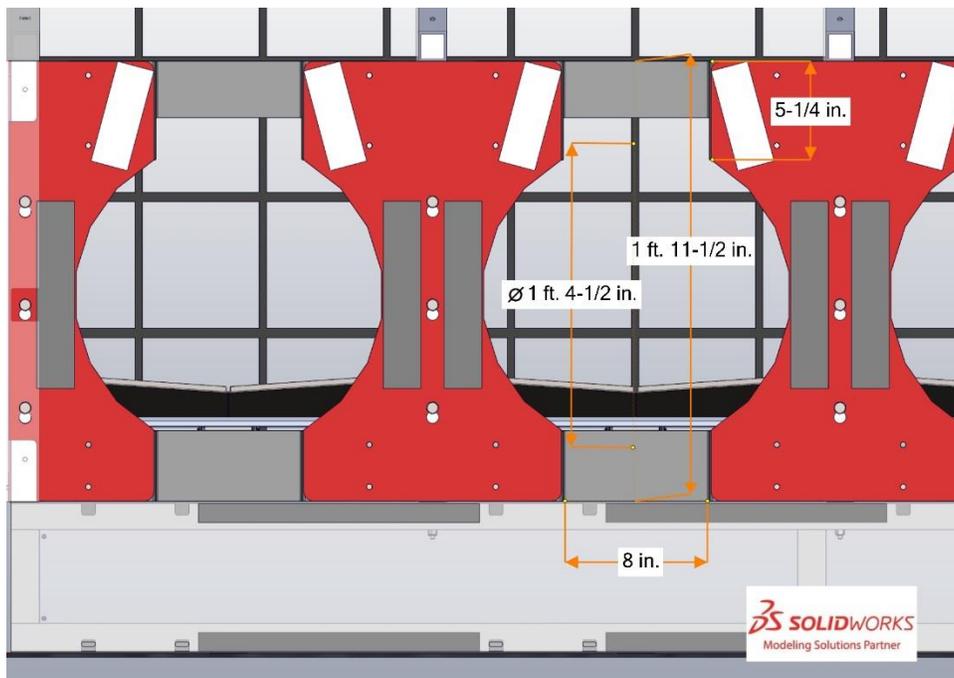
CARGO SHIP HATCH geometry and dimensions.
